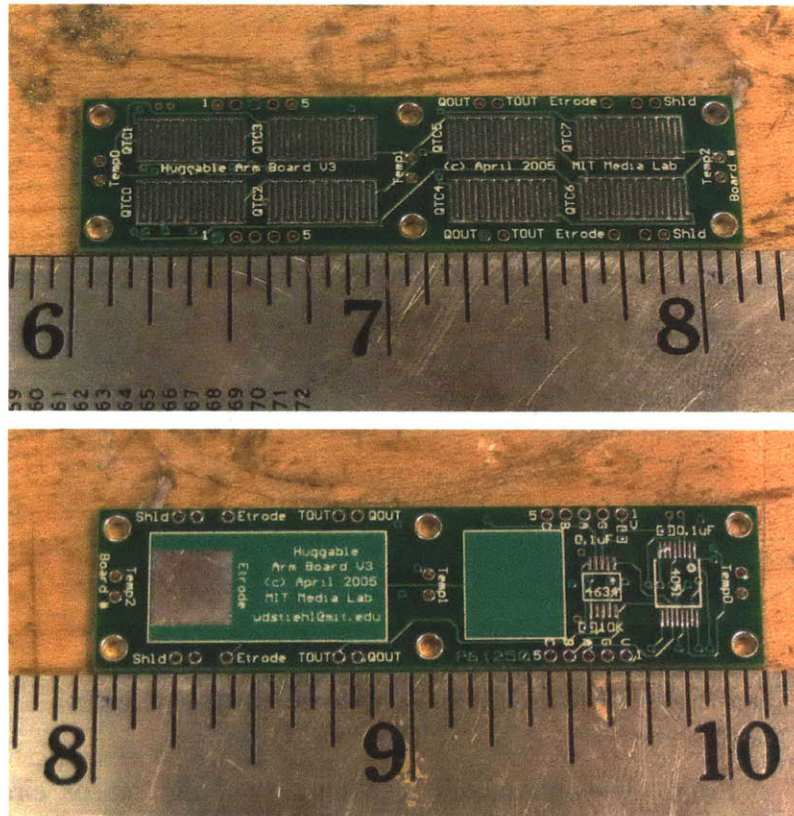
The Huggable Arm Sensor Circuit Board. At top is the top view of the circuit board. At bottom is the bottom view of the circuit board. The eight QTC electrodes are shown at the top. The small pairs of holes located between the mounting holes are for the mounting of the thermistors. The light green rectangles on the bottom of the circuit board are the solder masked electrode for the electric field sensor. The multiplexers for the temperature and QTC sensors are located to the right of the bottom image.
